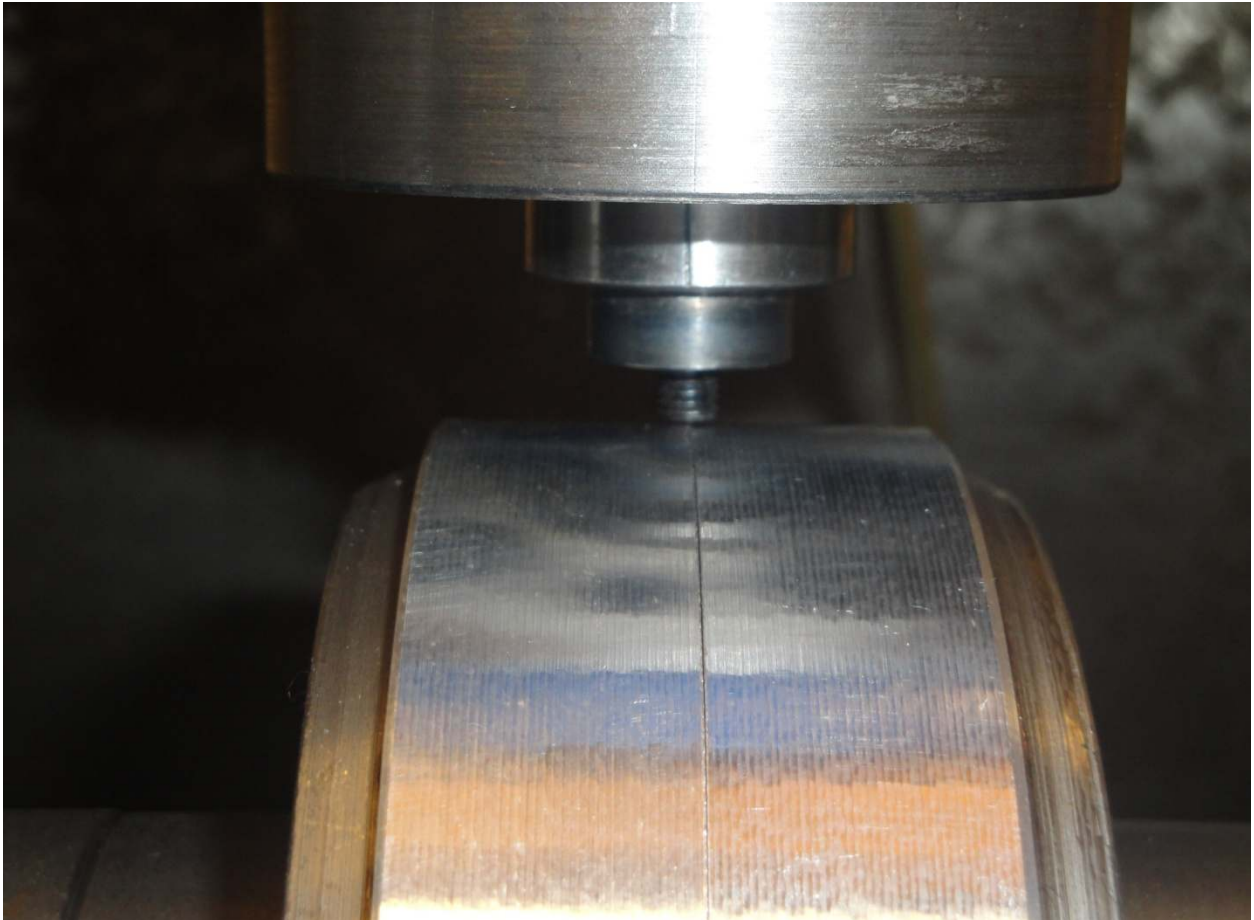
A closeup view of a tool used in the experiment and the butted weld specimens used in the experiment. The pipe sections are shown mounted in the welding apparatus. The experiment is started from this position. The tool probe was position was calibrated, or zeroed, against the surface of the work. The tool rotation is started and the probe is plunged into the material until the desired contact is achieved with the shoulder on the cylindrical surface of the work.
